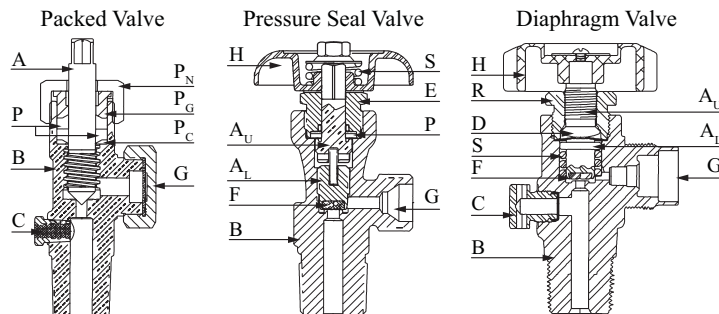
Valve diagrams for packed, pack-less or pressure seal, and diaphragm valves. A) Stem; A_U) Upper Stem; A_L) Lower Stem; P) Packing; P_N) Packing Nut; P_G) Packing Gland; P_C) Packing Collar; B) Valve Body; C) Pressure Relief Device; G) Outlet (with cap); H) Handwheel; S) Spring; E) Bonnet; F) Valve Seat; R) Retainer; D) Diaphragm.
